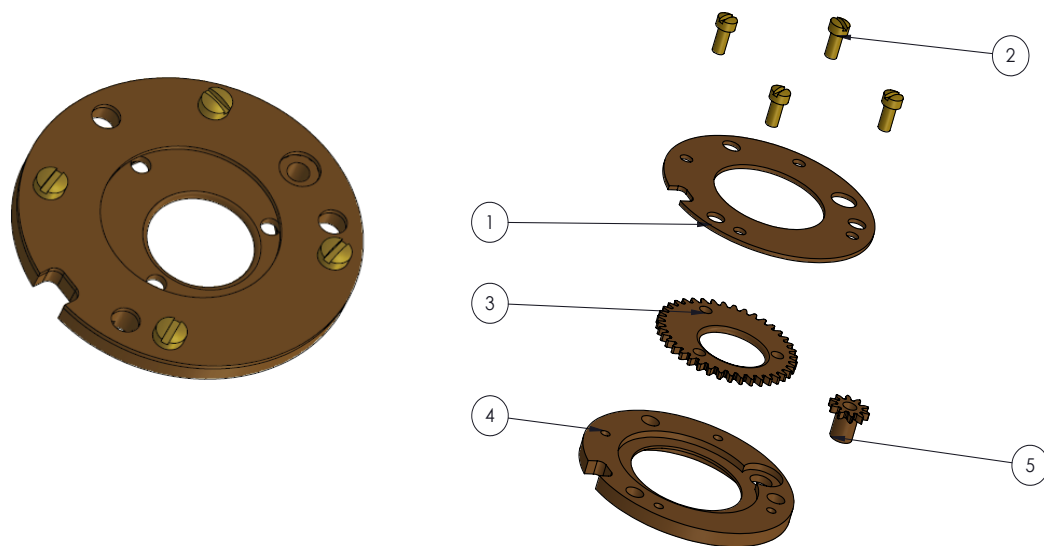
CAD drawing of the gear mechanism. The top SMA connector of CB passes through the central hole of the gearing mechanism, which is affixed to the top of CBH. The gears can be rotated with respect to the outer casing via a control rod threaded into the small gear (hole opposite the notch). Since the rotating central gear forces the aperture to move relative to CBH – and thus relative to CB’s pivot axis – CB’s pitch will adjust in a smooth and reproducible manner. ① the top gear cover plate; ② brass screw that holds the top gear cover plate to the gear cartridge (0-80 x .125”); ③ central ring gear that contains the aperture; ④ containing-gear cartridge; ⑤ the drive gear that threads onto the control rod and interfaces with the central ring gear.
